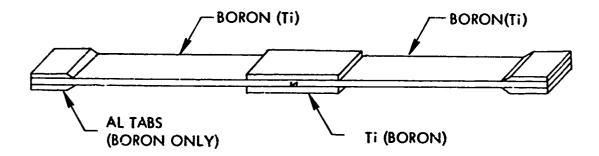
EDGE VIEW OF CONFIGURATION "C" SPECIMEN
